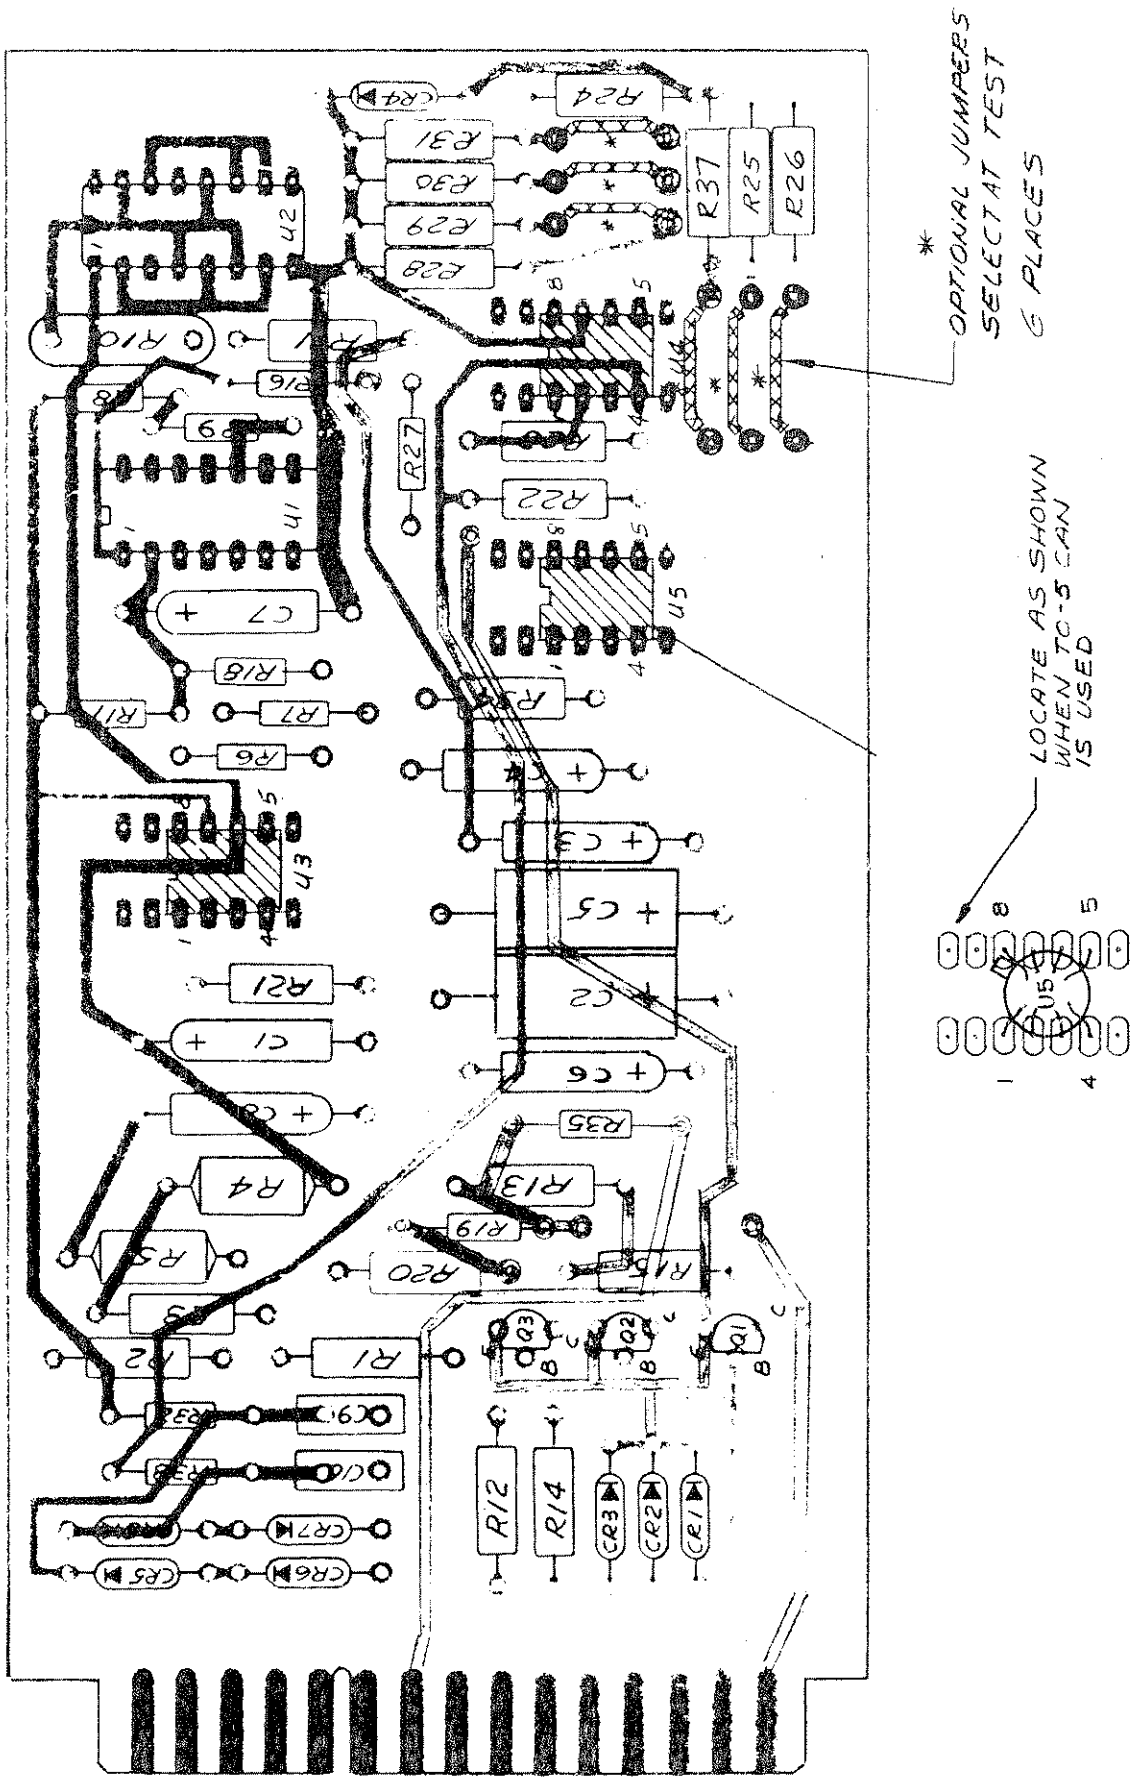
Main Frame Card A5 DC Amplifier Circuits, Parts Location (Drawing No. 102516E)
